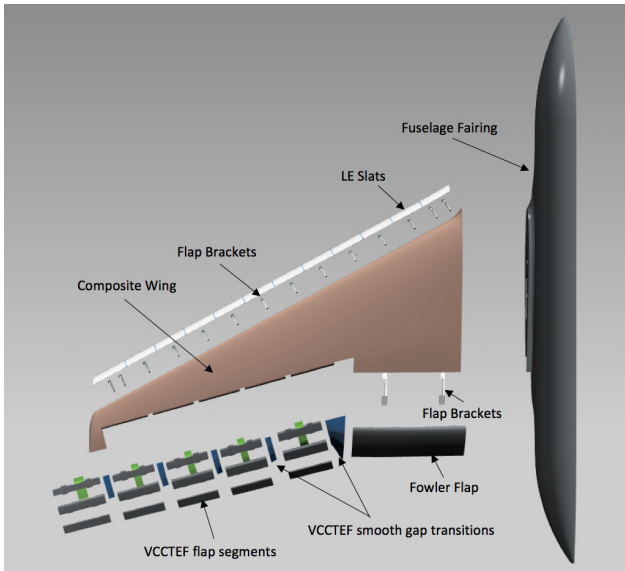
Exploded View of High-Lift GTM Wing (Courtesy of University of Washington Aeronautical Laboratory)
